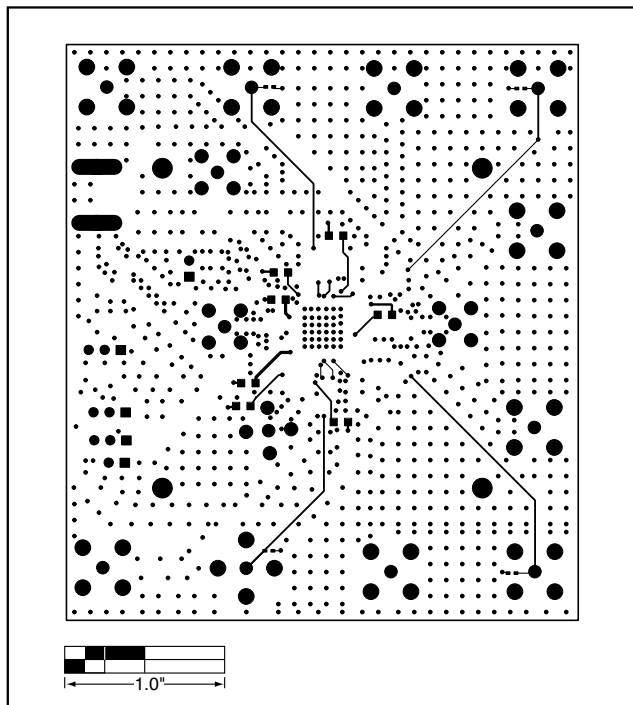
MAX2700/MAX2701 EV Kits PC Board Layout—Solder Side
